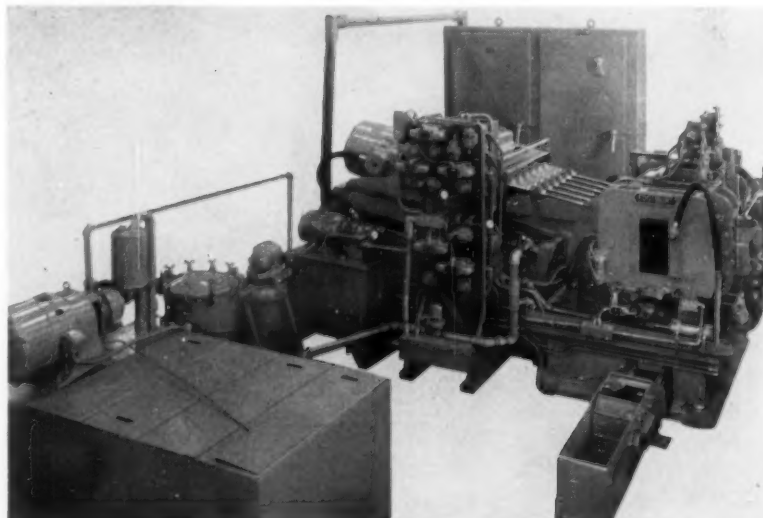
(above) Fluid motor carriages are swung open to show belt drive design recommended for gun drilling machines.
